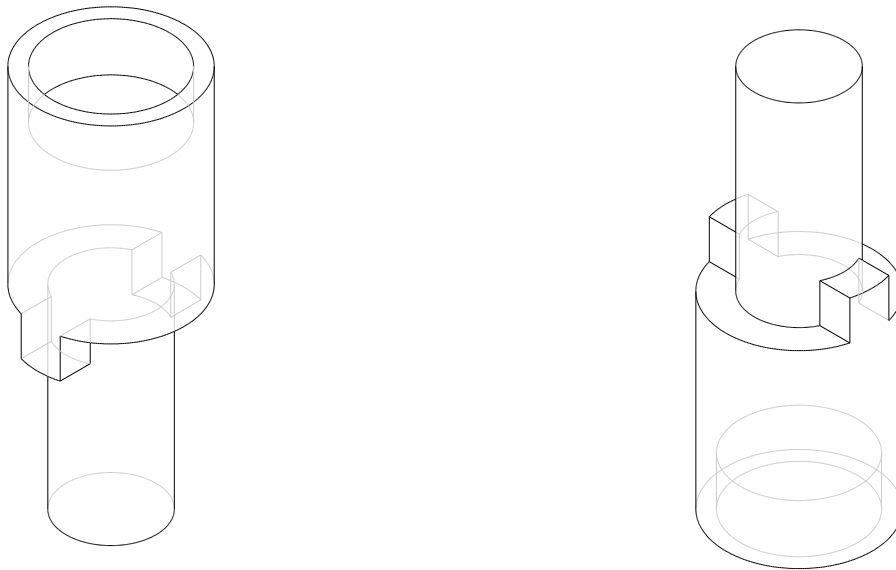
Wire frame model of the DD-64 magnet mount.
